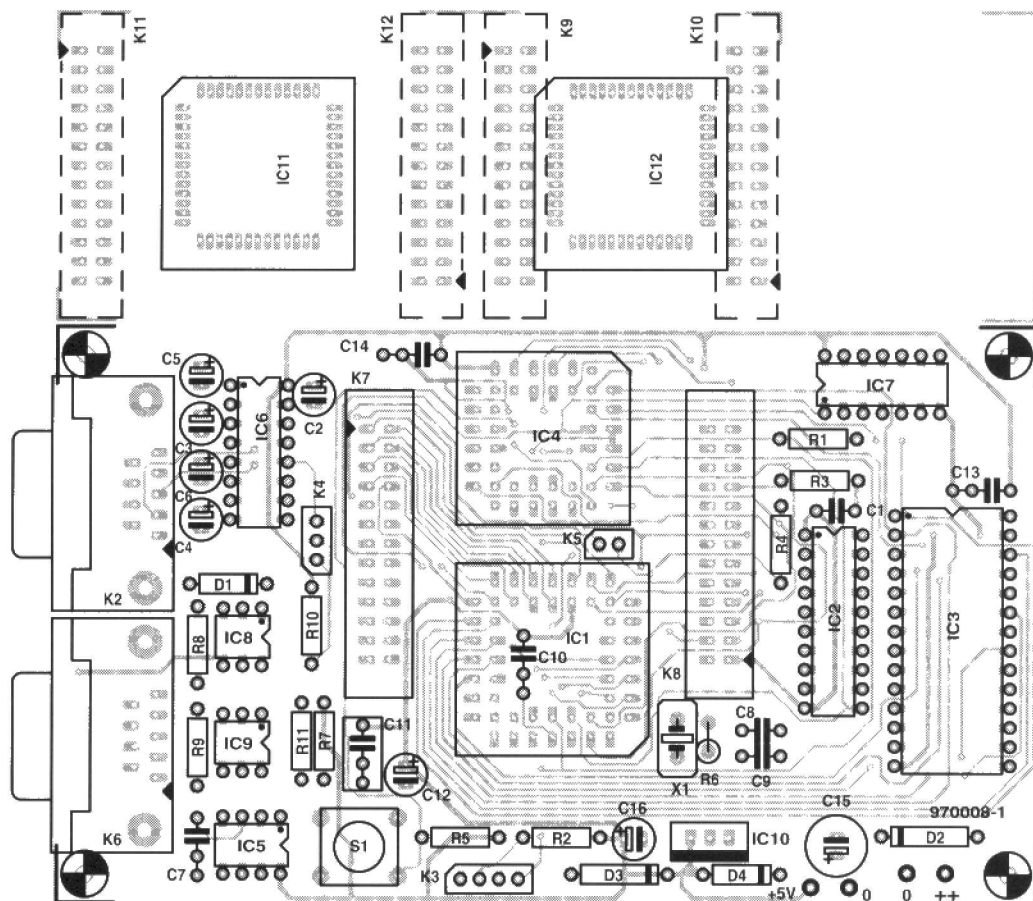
Component mounting plan (actual size) and track layouts (75%) of the PCB designed for the emulator. The double-sided board has to be cut to separate the emulator section from the two probes, which are single-sided boards (board available ready-made, see Readers Services page).
